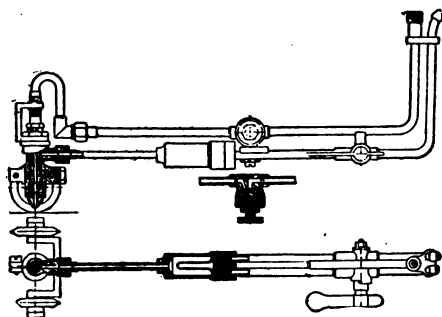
Vertical and horizontal cross sections of autogenous cutting burner having central oxygen nozzle and equipped with roller attachment.
